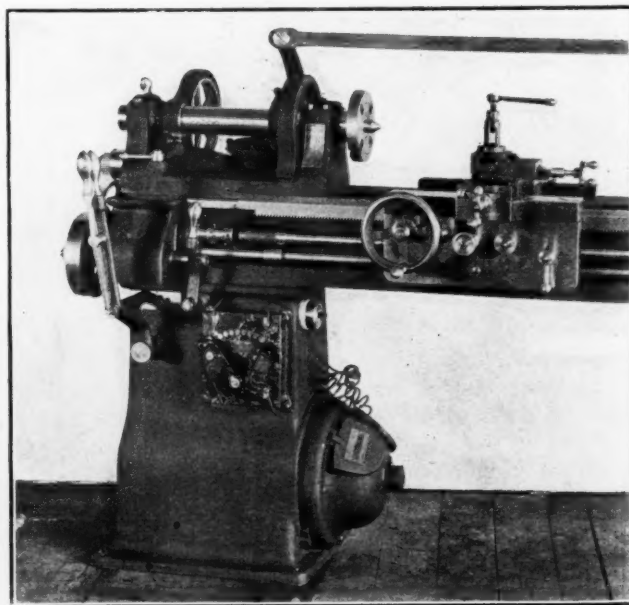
INTERESTING NEW DESIGN OF GEARED VARIABLE SPEED, ENCLOSED DRIVE FOR A LATHE WITH CONSTANT SPEED MOTOR.—FLATHER & COMPANY.
